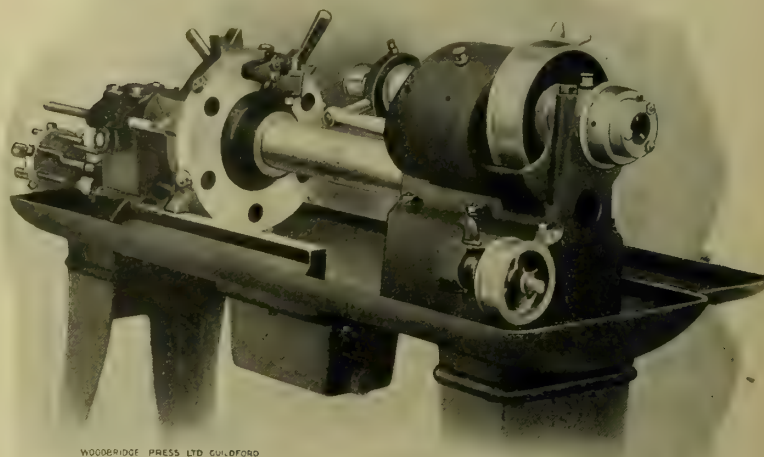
RING TURRET LATHE. MESSRS. DRUMMOND BROS., LTD.
